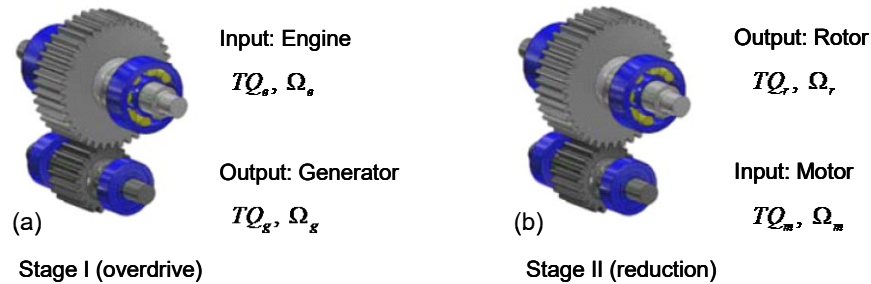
Single-stage gearboxes in serial gas-electric hybrid multirotor UAV: a) stage I, engine-generator gearbox (overdrive) and b) stage II, motor-rotor gearbox (reduction)
